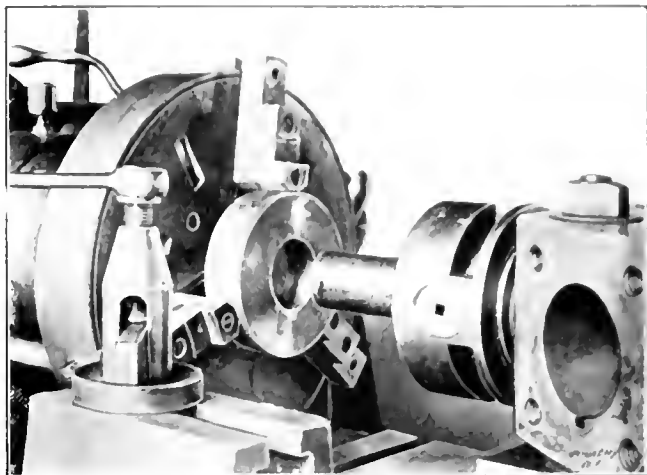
Use of Adjustable Head in Turret Lathe. Chuck replaced by Heavy Boring Tool.
